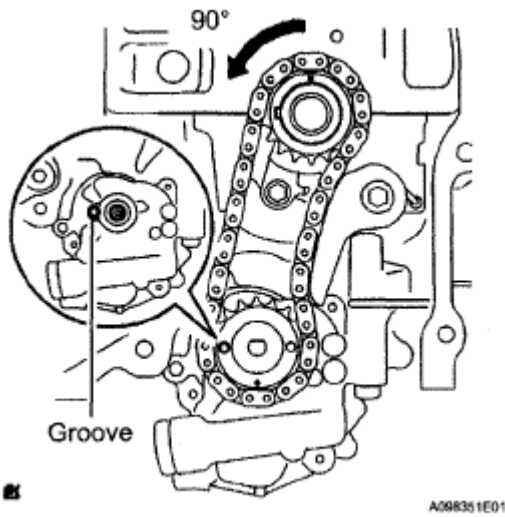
Identifying Crankshaft 90° Counterclockwise
